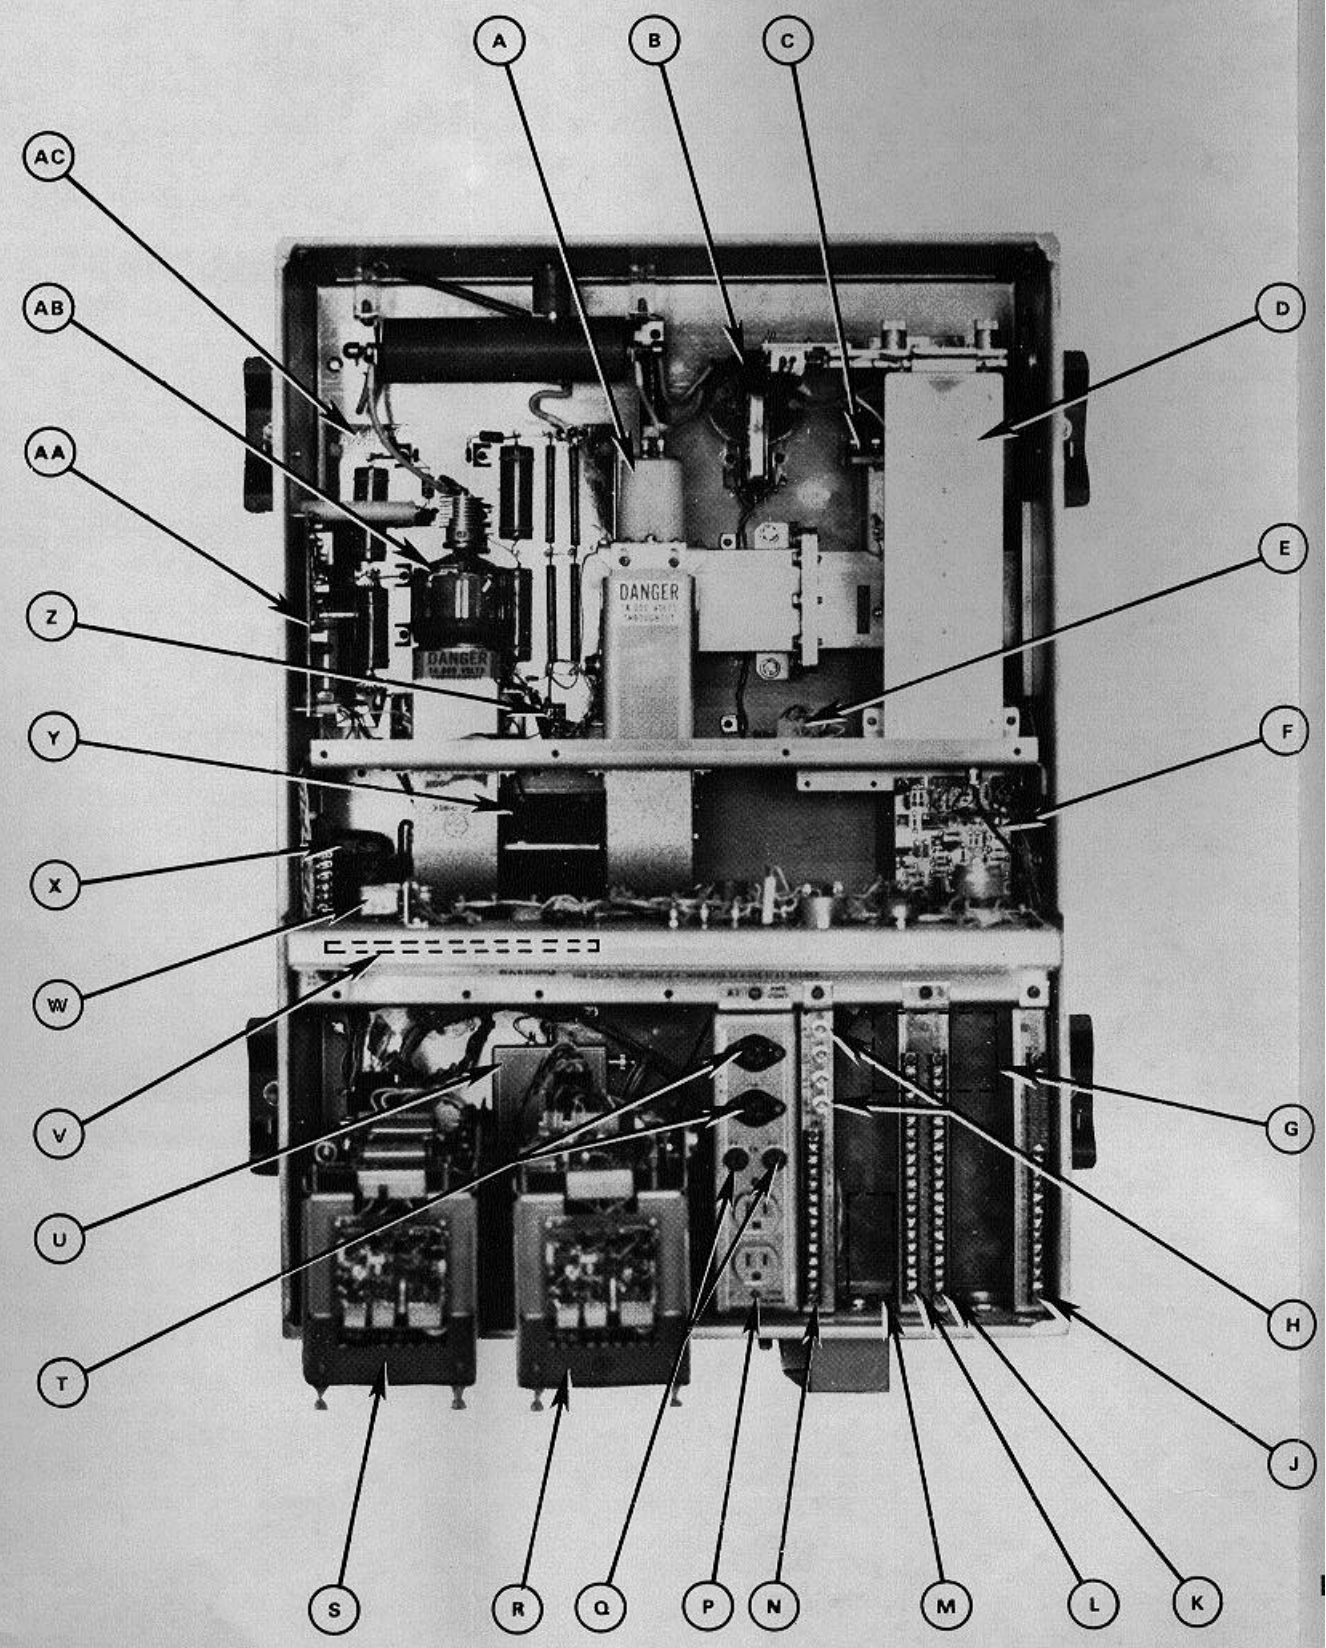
Receiver transmitter RT-1241 Parts Location (V4)
